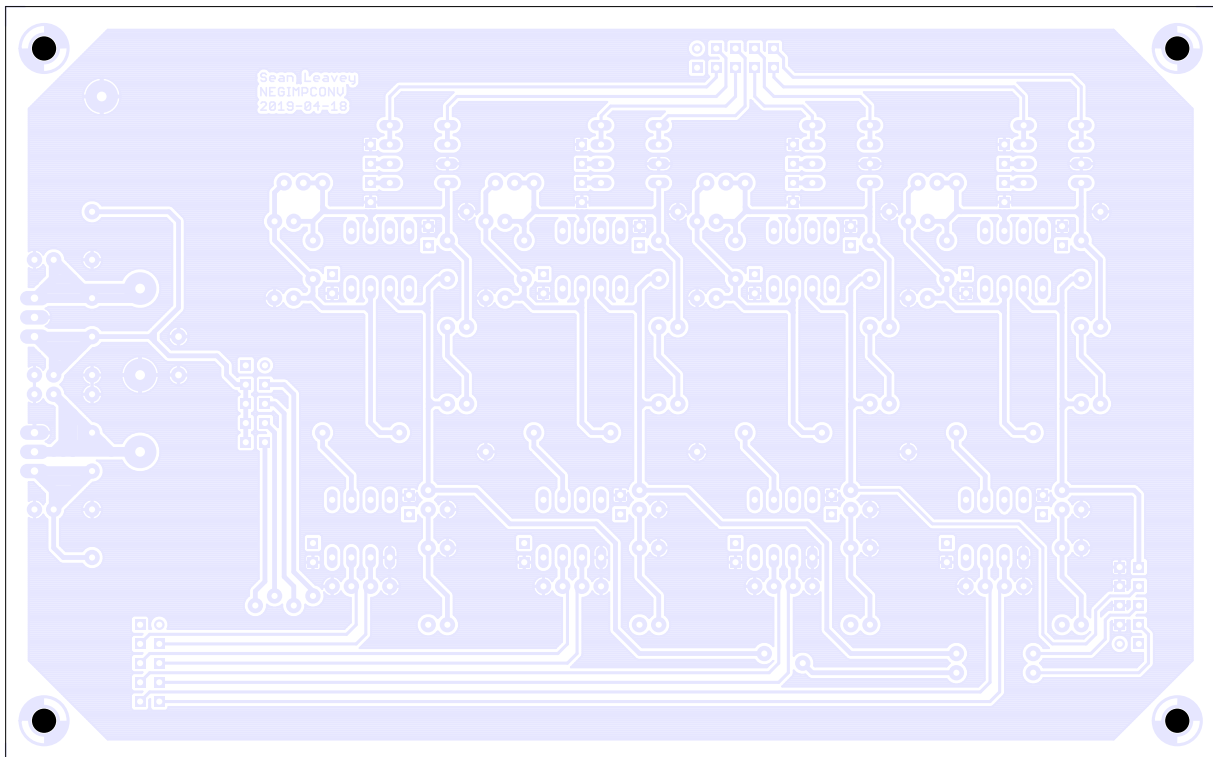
Board bottom view showing drills with 3.2 mm (0.126 in) diameter
